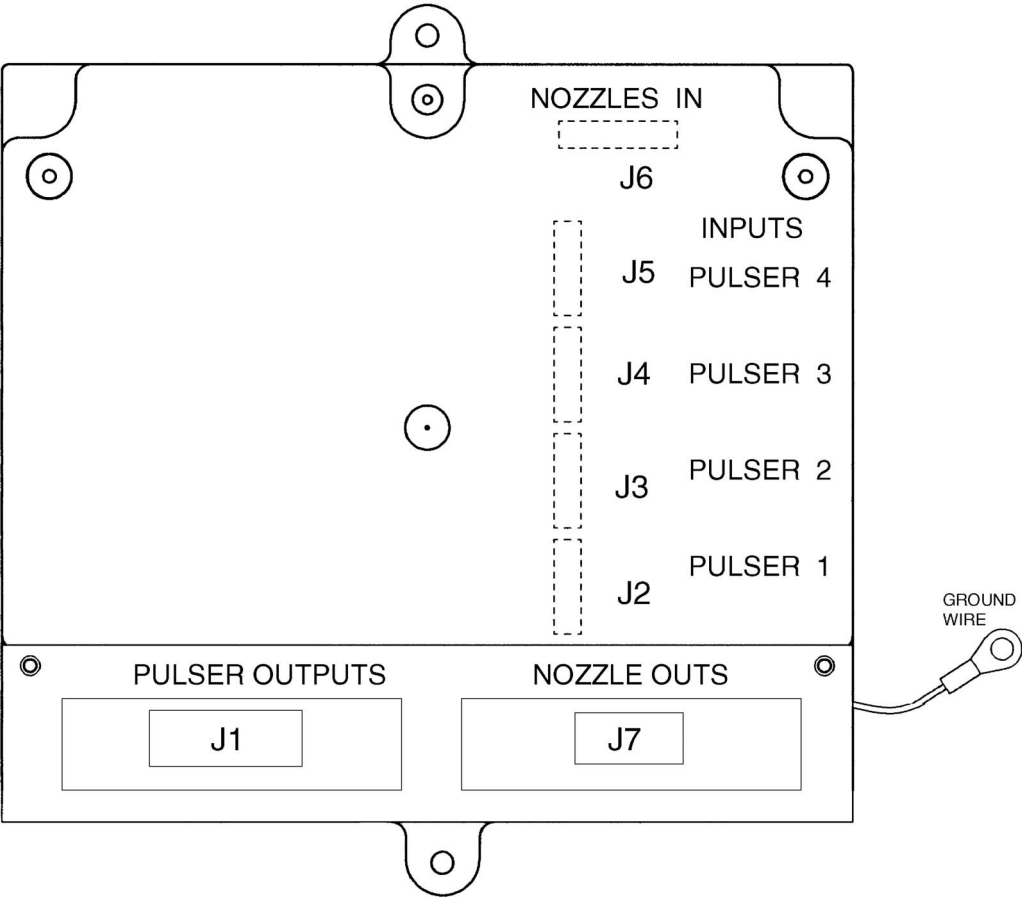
ISB BOARD ASSY. LAYOUT.
